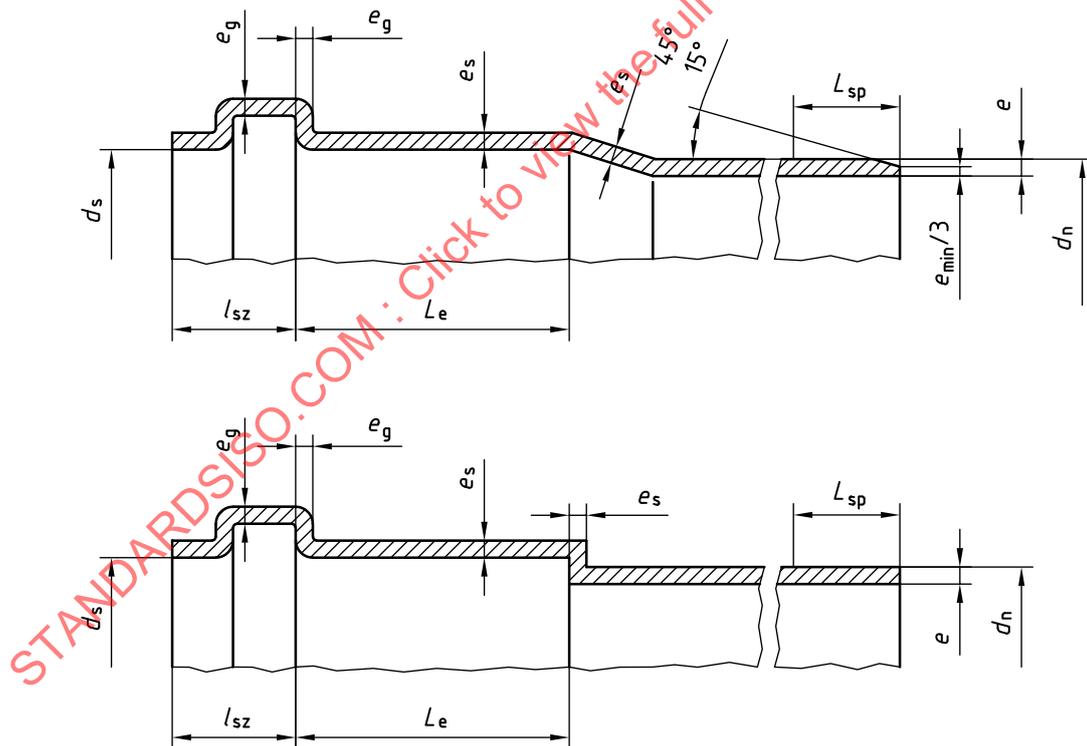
Dimensions of sockets and spigot ends for ring seal joints
